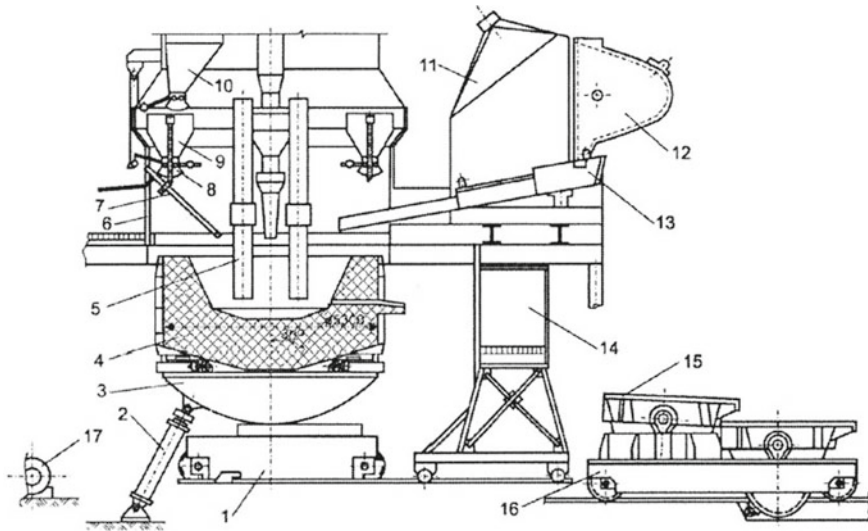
7 MV • A refining electric furnace with draw-out bath: 1—trolley roll-out bath furnace; 2—hydraulic cylinder of the furnace tilt mechanism; 3—cradle; 4—furnace bath; 5—graphite electrodes; 6—curtains with exhaust hood; 7—loading tray; 8—shutter; 9—intermediate hopper; 10—furnace bunker; 11—a chamber with an exhaust hood; 12—ladle with low-phosphorus slag; 13—jellied trench; 14—trolley of the furnace platform; 15—metal-receiving bucket; 16—bucket trolley; 17—winch
